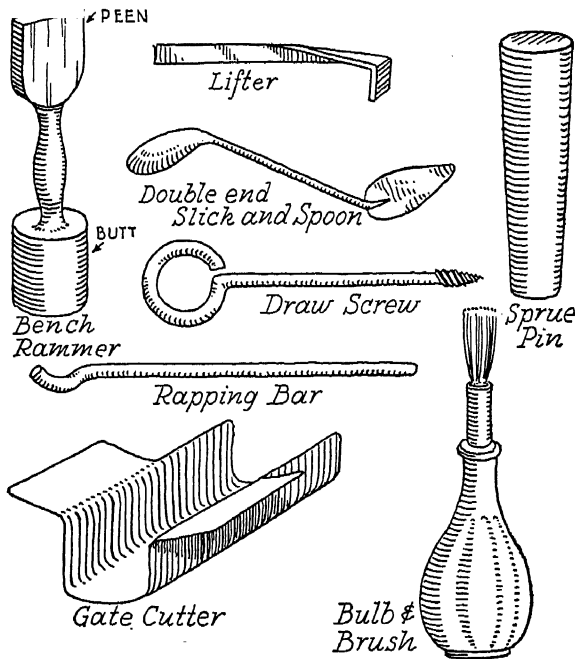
Useful molding tools. Many of these tools can be made in the shop
